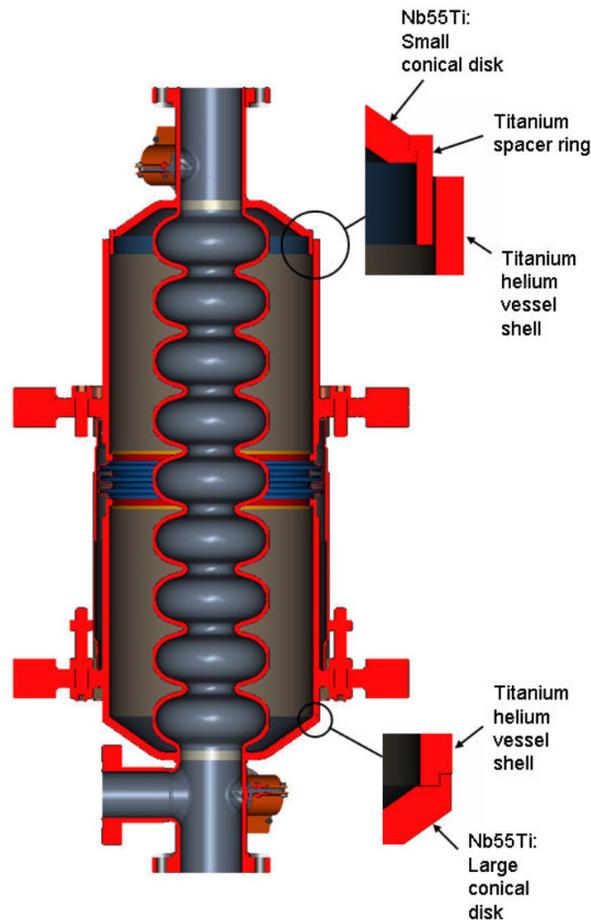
Breakaway view of dressed cavity showing the weld joint geometry.
